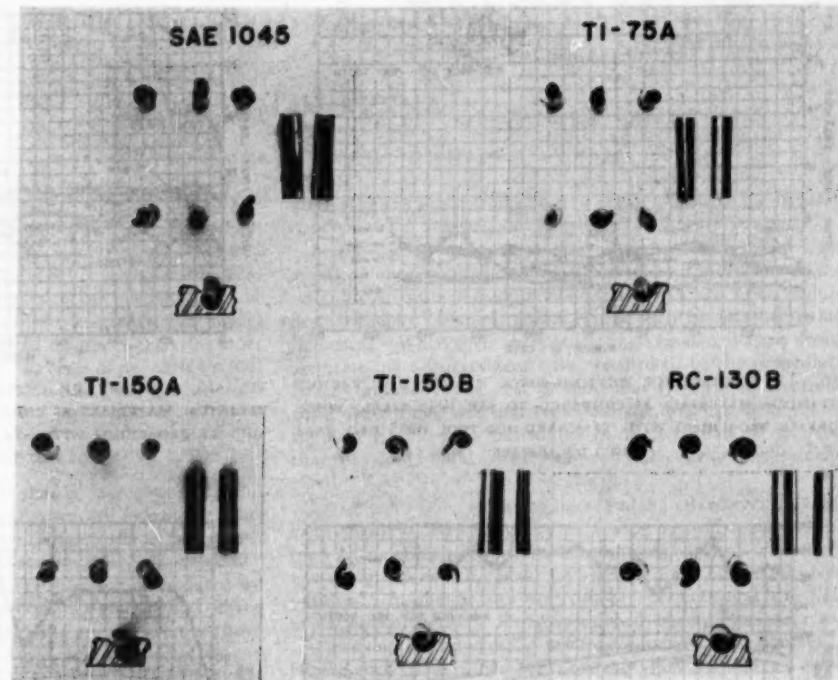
TYPES OF CHIPS FORMED ON VARIOUS MATERIALS, WHEN SURFACE BROACHING WITH STANDARD HSS TOOL OF 5 DEG RAKE AND 5 DEG RELIEF; 0.005-IN. RISE PER TOOTH
